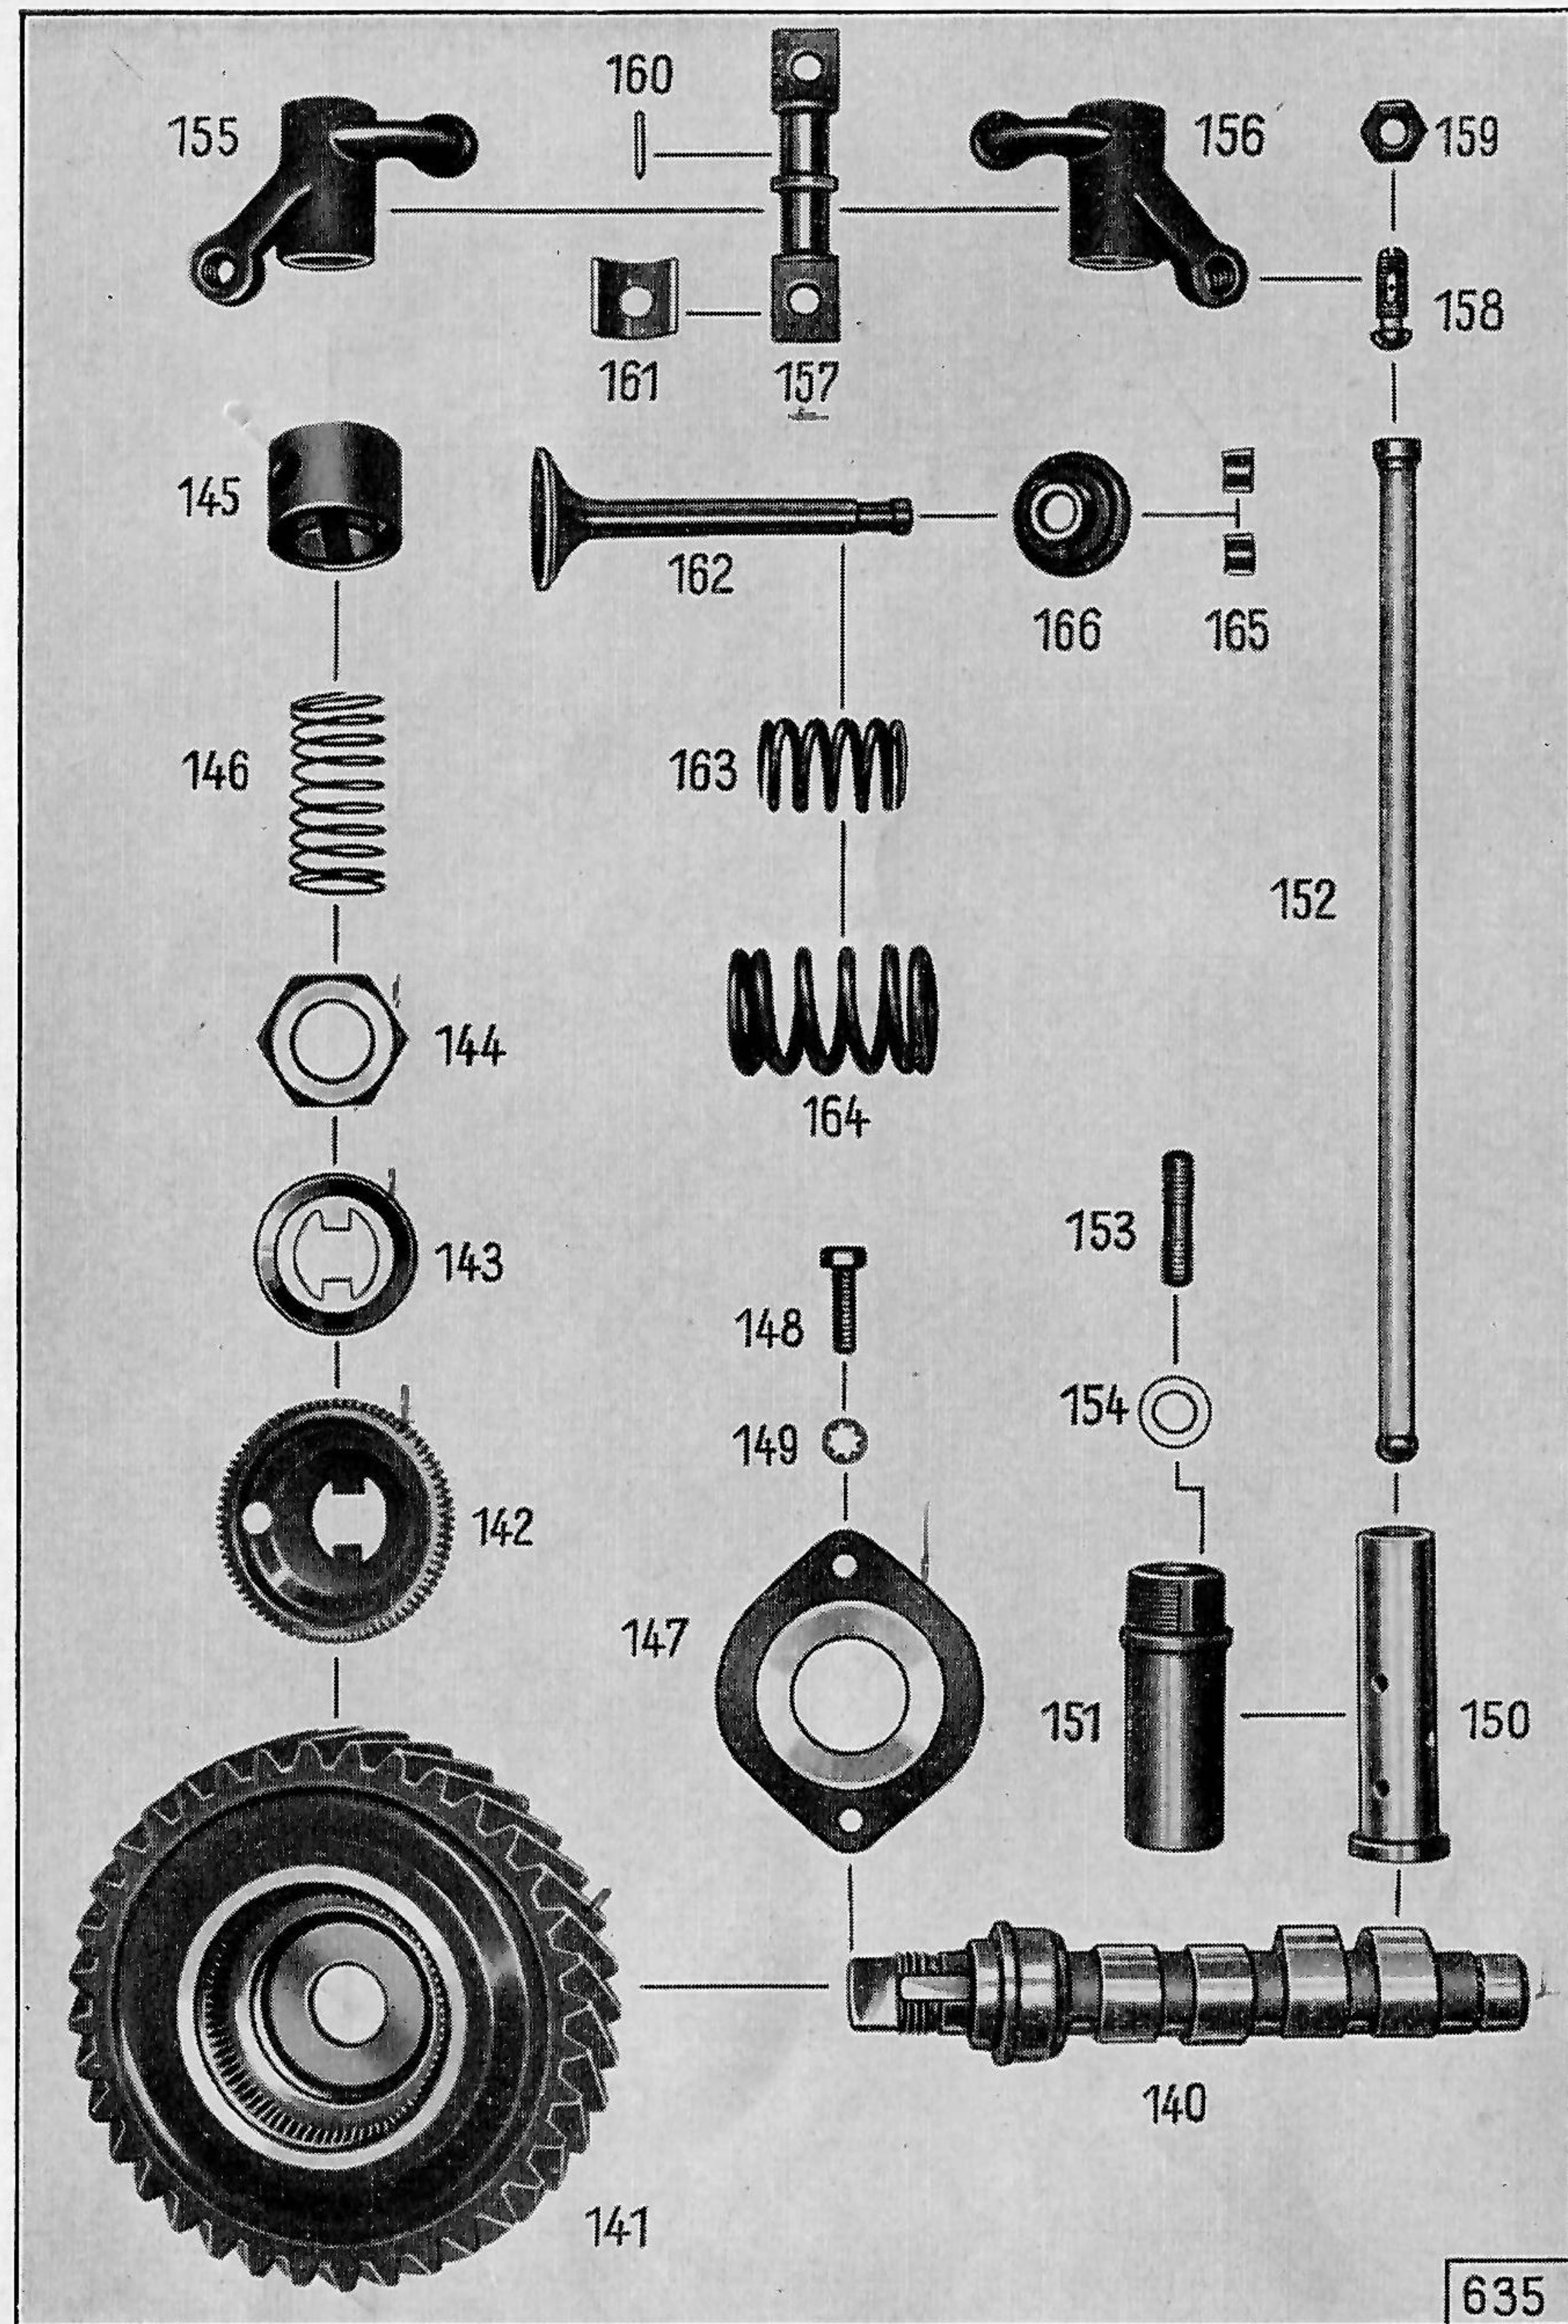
, Group M: d) Valve Drive, Camshaft and Valves
